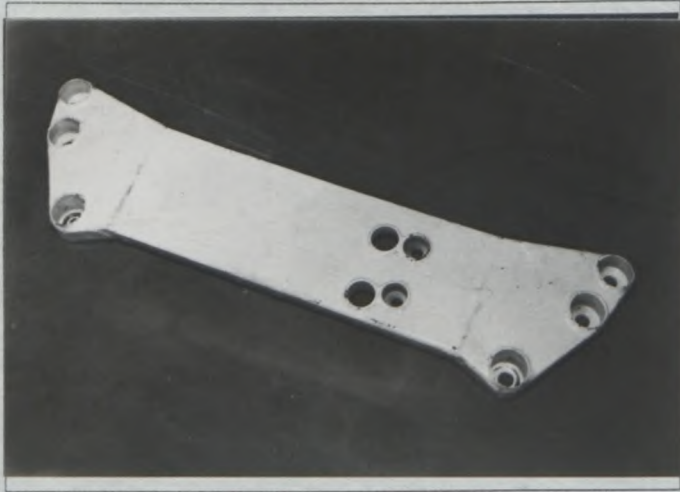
REINFORCED FRONT SUBFRAME TYPE B
